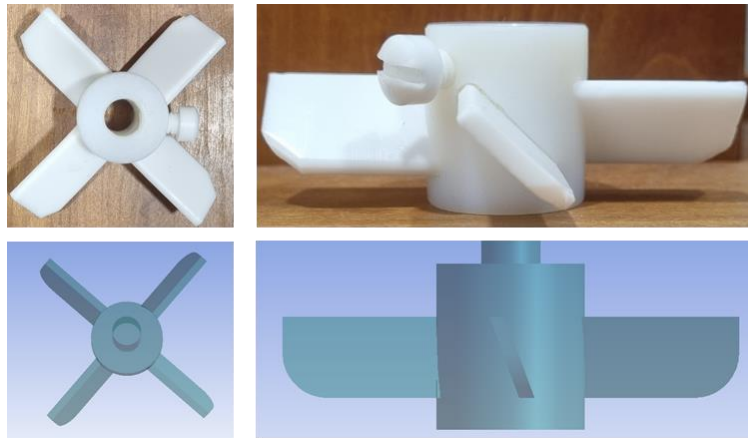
Impeller used in the stirred tanks and the CAD versions created in ANSYS Design Modeller
